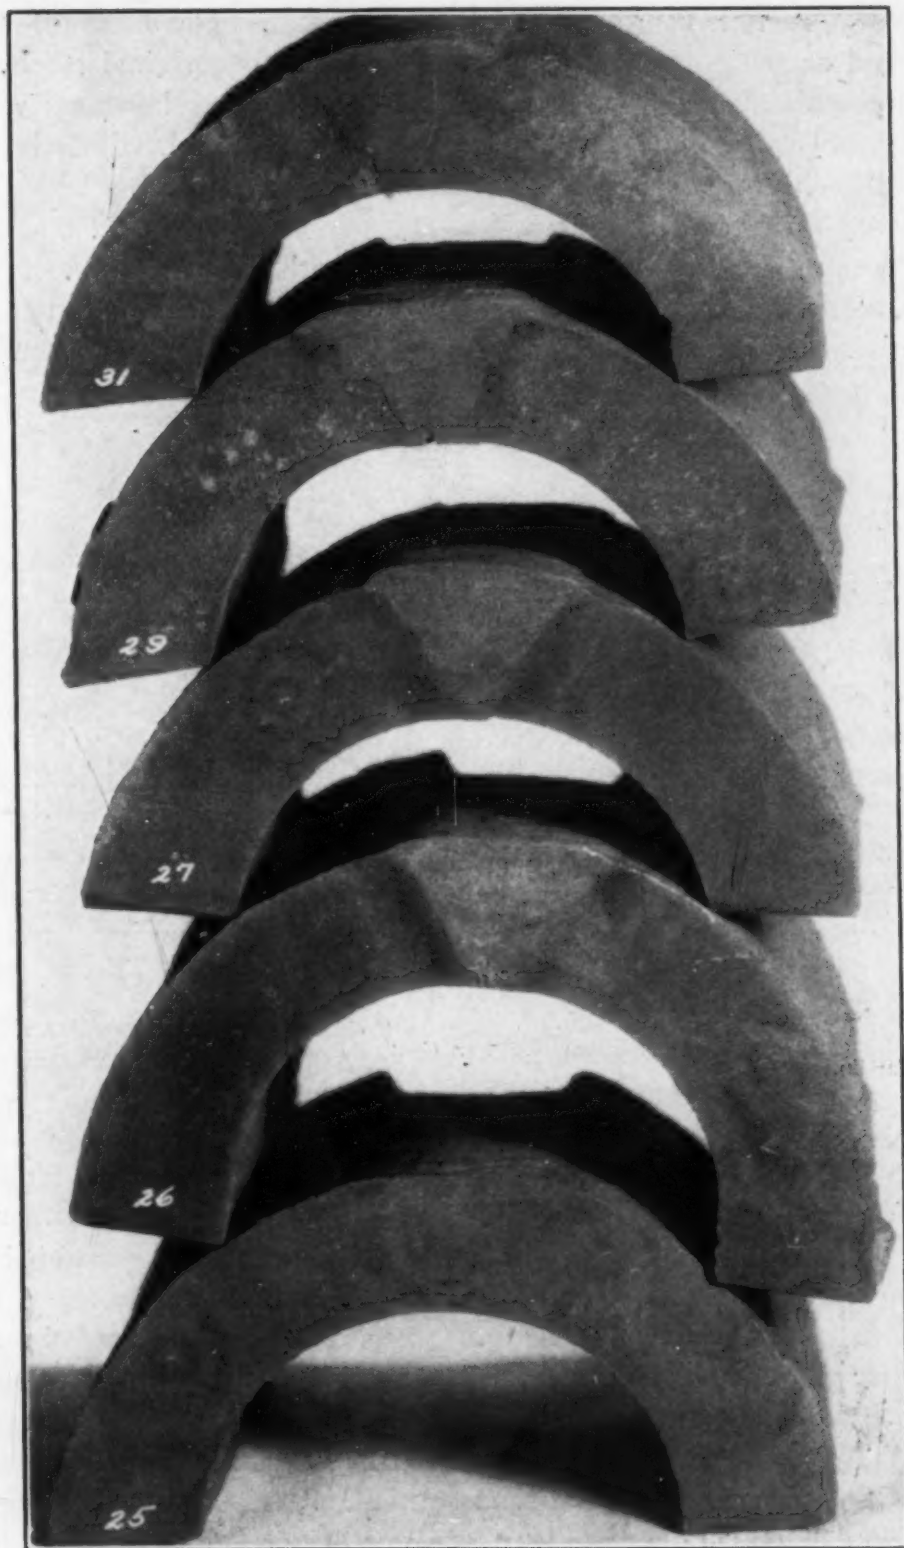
Deep Etched Cross Sections of Welds in 4 to 6 Per Cent Chromium, 0.5 Per Cent Molybdenum Steels After Stress Relieving Heat Treatment. Serial No. 31—0.38 Per Cent Carbon. Serial No. 29—0.27 Per Cent Carbon. Serial No. 27—0.13 Per Cent Carbon. Serial No. 26—0.09 Per Cent Carbon. Serial No. 25—0.07 Per Cent Carbon.
